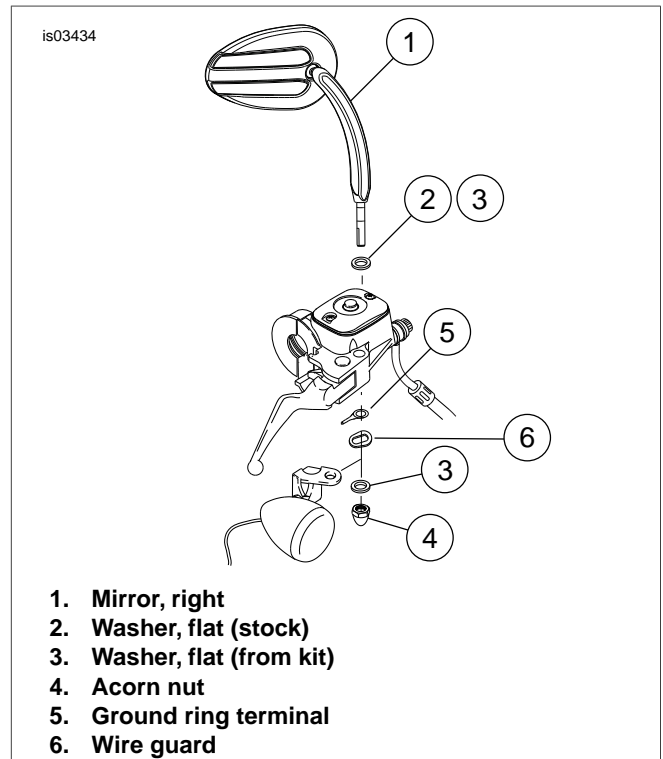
Install R.H. Lighted Mirror (Except Sportster, Dyna, FXSTD, FLSTF, FXSTS, FLSTS, VRSC)
